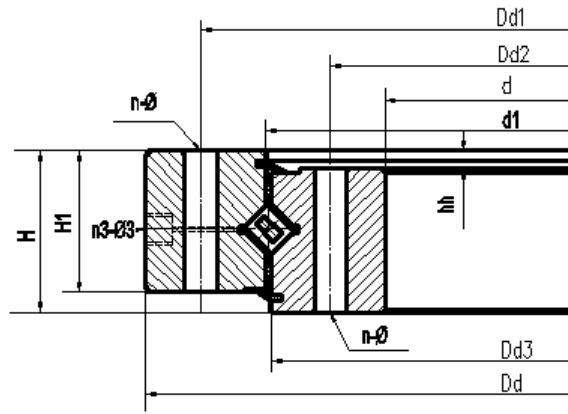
Crossed cylindrical roller slewing bearings with internal gears
